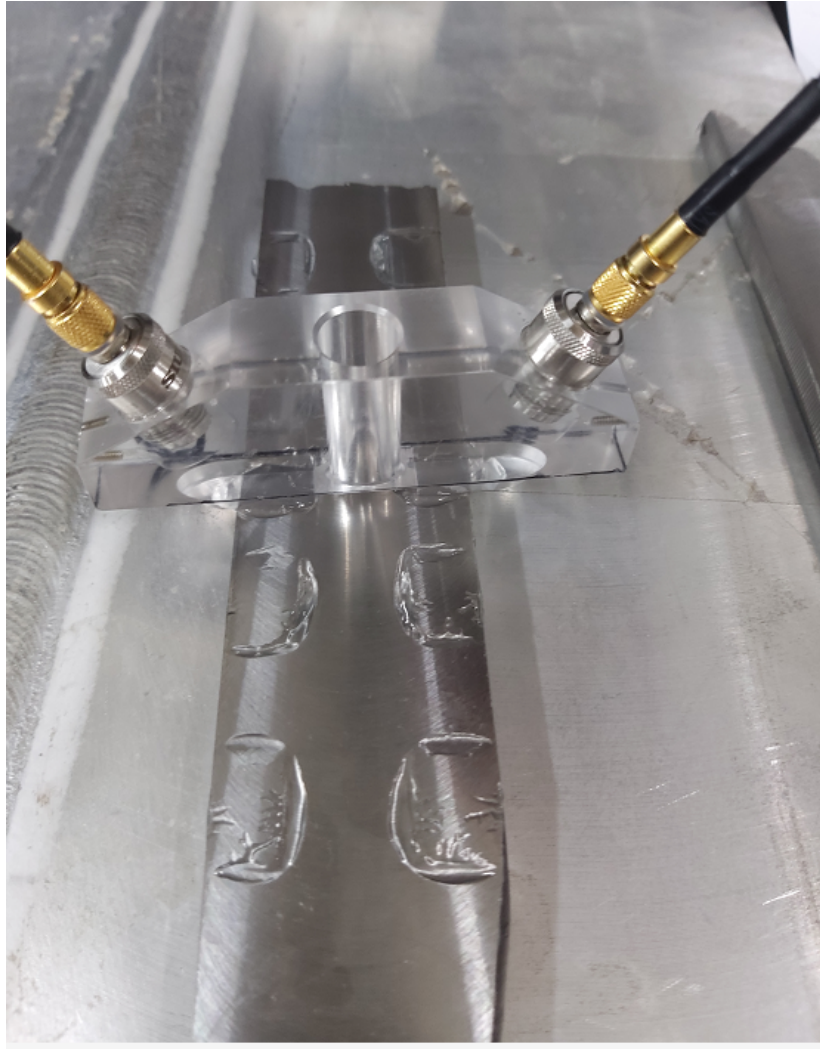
Scanning the welded part by an 45° angle sensor
